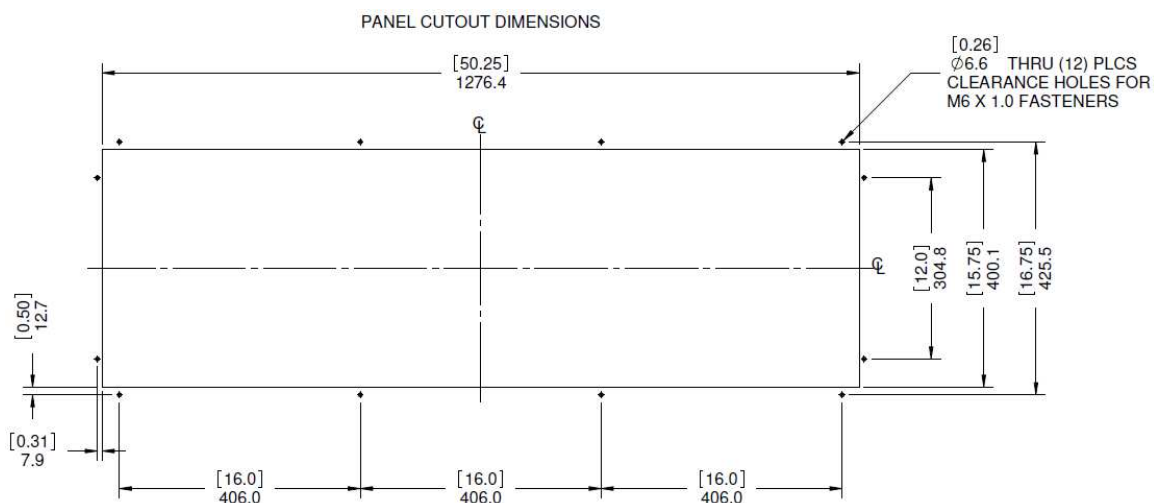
Panel cutout dimension of fixture ULF839VW Series
